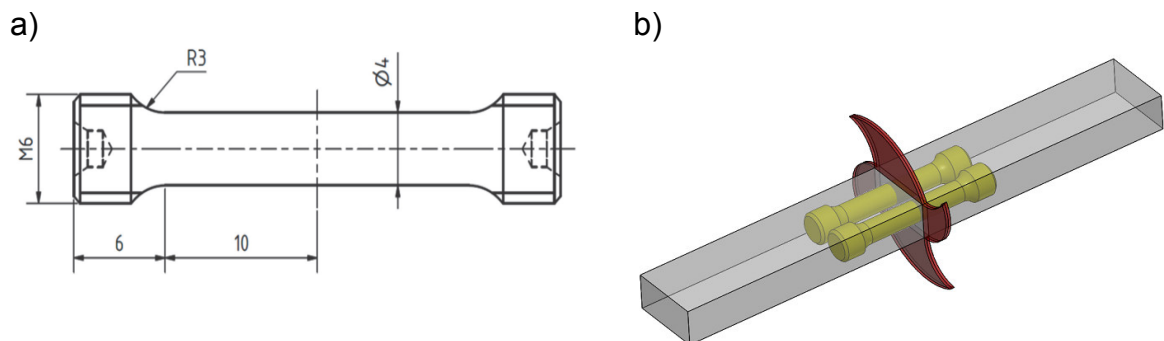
a) tensile test sample according to DIN6892 and b) machining position of the round tensile specimens.
